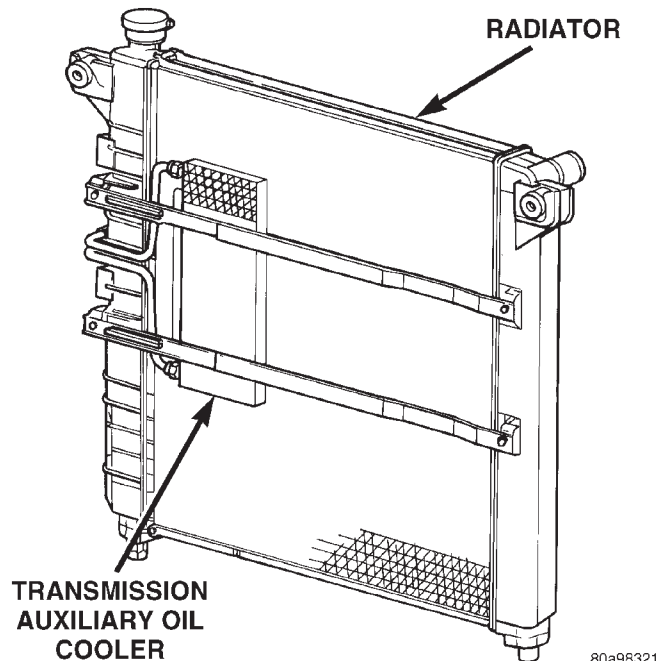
Transmission Oil Auxiliary Cooler—Typical
